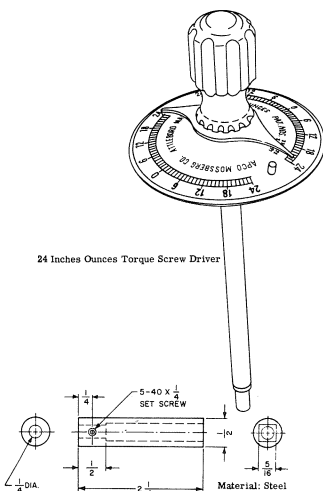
SUPPLY REEL SPINDLE TORQUE GAGE G17-38000
